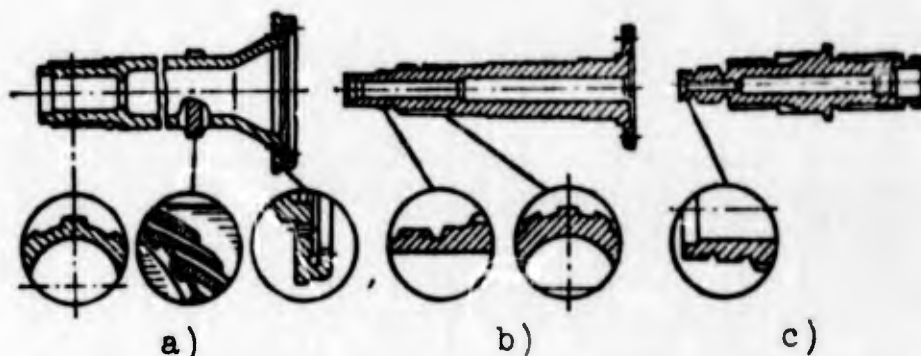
Shafts of aircraft engines. a) turbine shaft; b) reduction gear shaft; c) turbo-pump assembly shaft.
